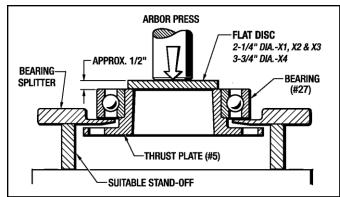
Removing Thrust Plate (#5) From Bearing (#27)
